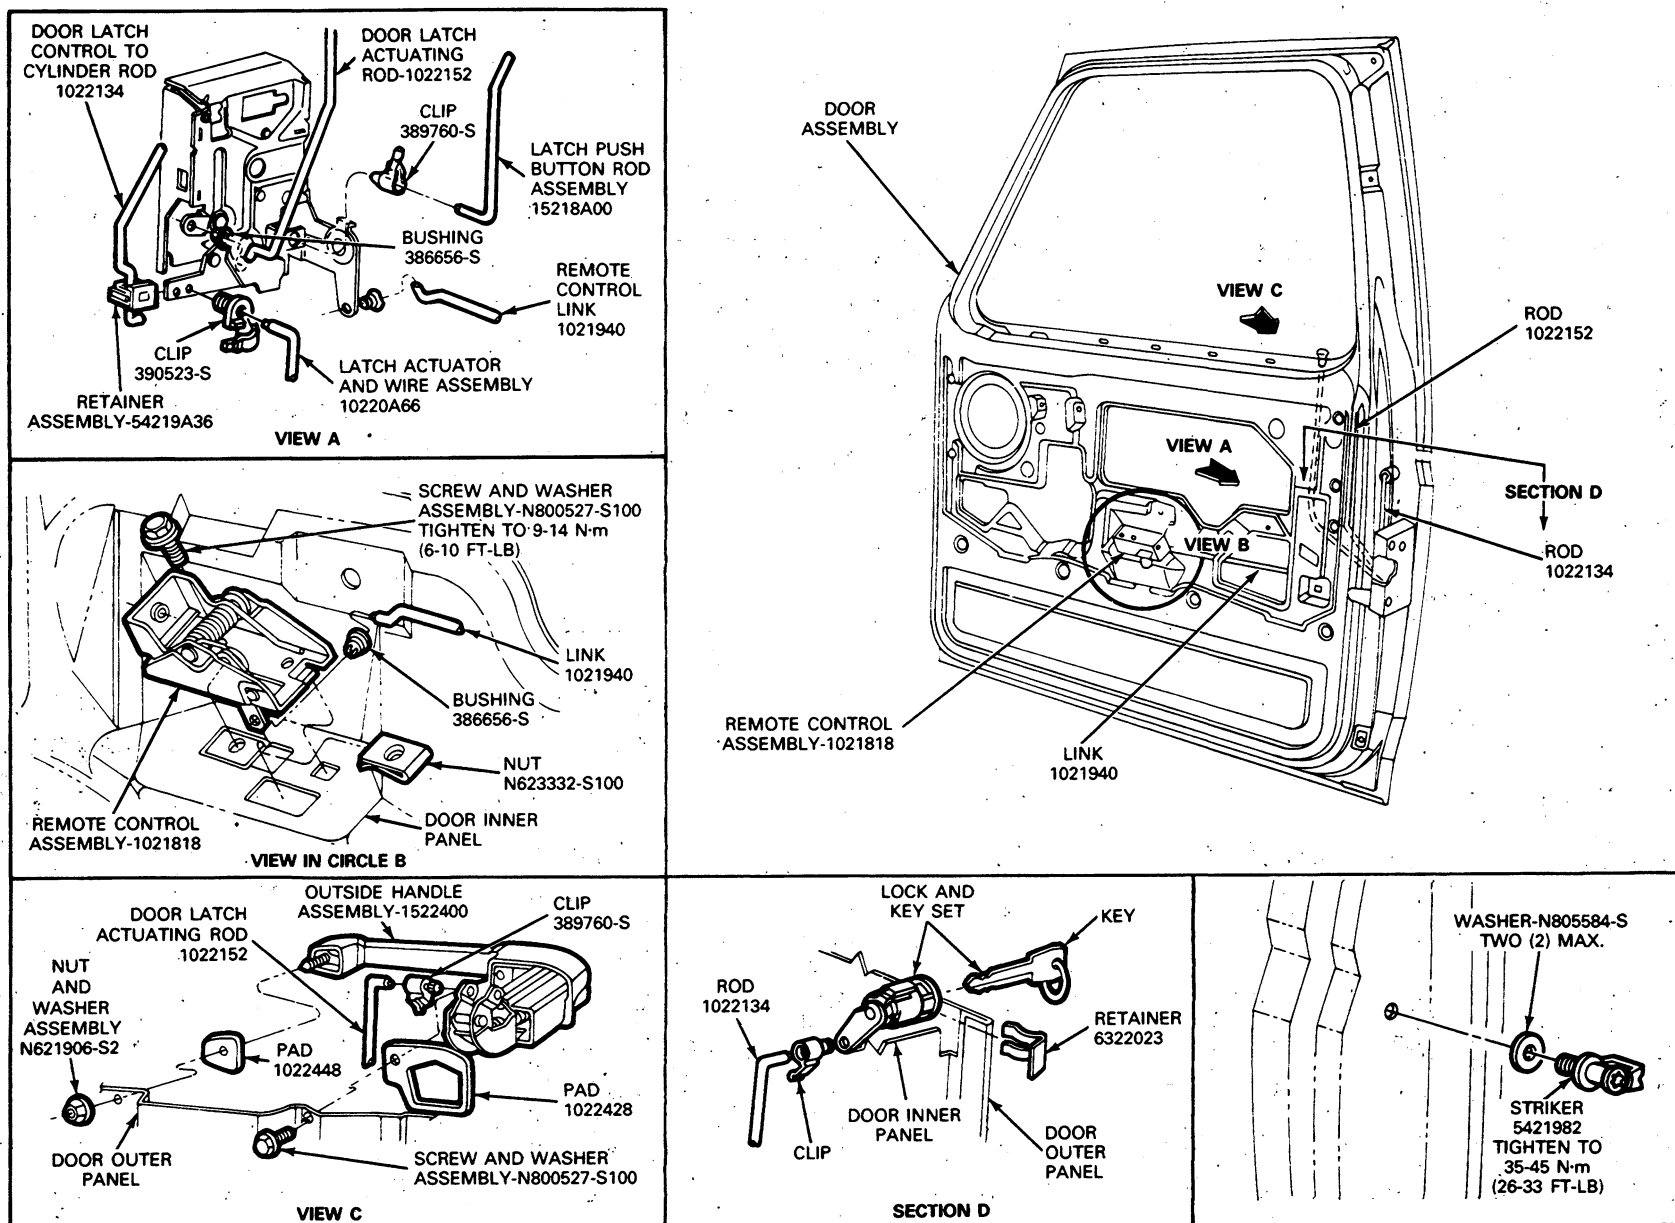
Latch Striker Adjustment—Typical Bronco, F-150—F-350 and E-150—E-350
